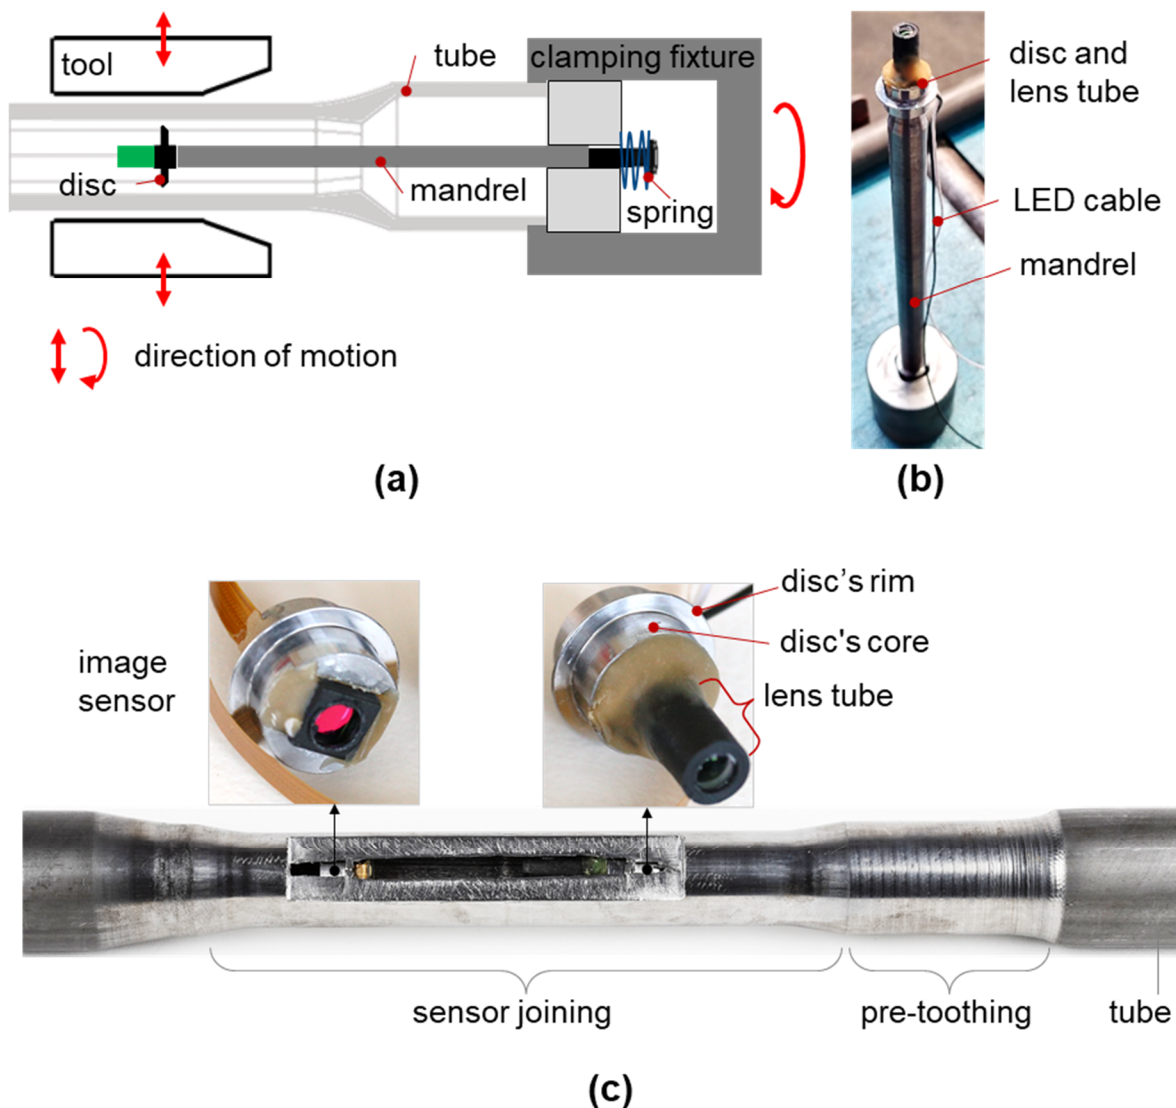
Sensor integration into the tube through recess rotary swaging. (a) Visualizing the joining process; (b) photo of the sensor-carrying disc screwed to the mandrel [O6]; (c) both sensor components integrated into the tube.
